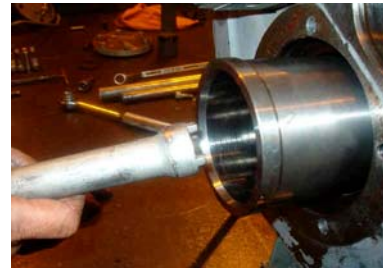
Position sensor rod removed (125) for removal of the inner tension spring (119)
